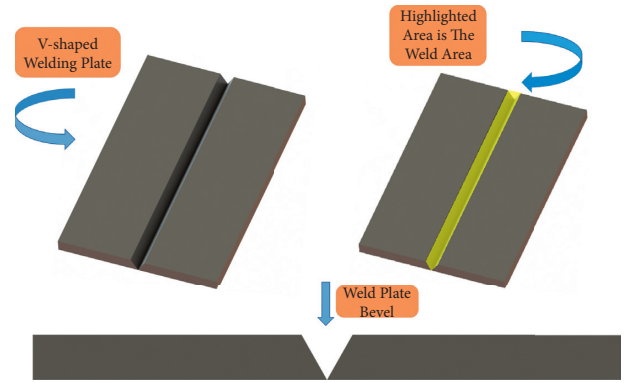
Diagram of the CAD model of the welded plate and the area of the weld.
